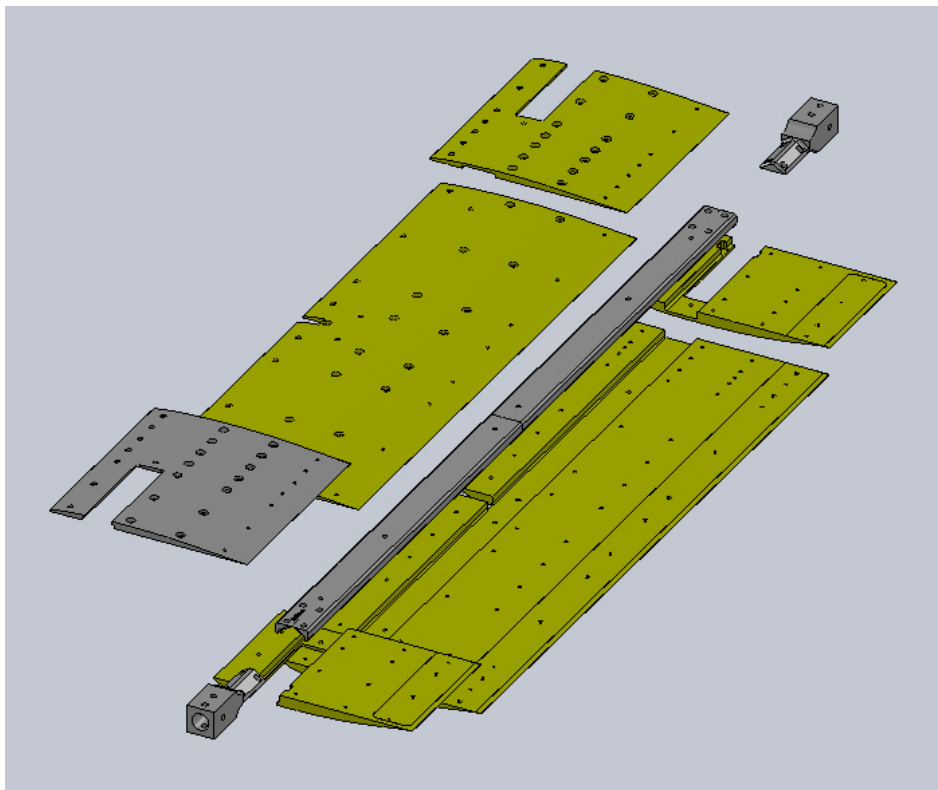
Exploded view of SSC-A09 SolidWorks model (bottom up)
